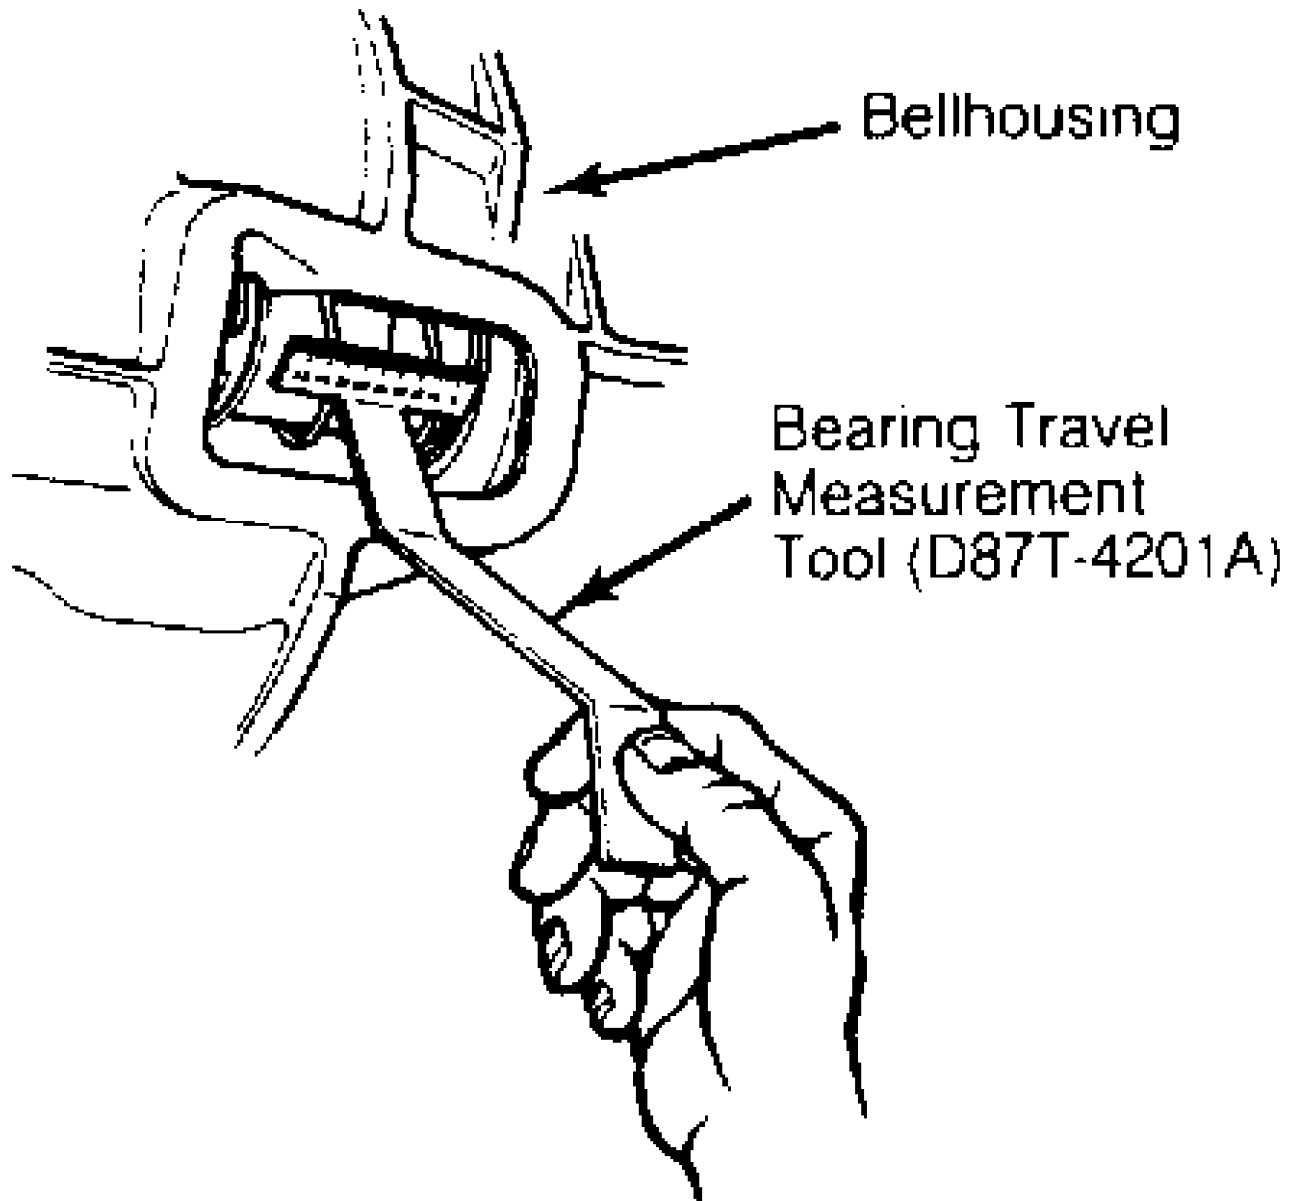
Measuring Clutch Release Bearing Travel (Navajo)
